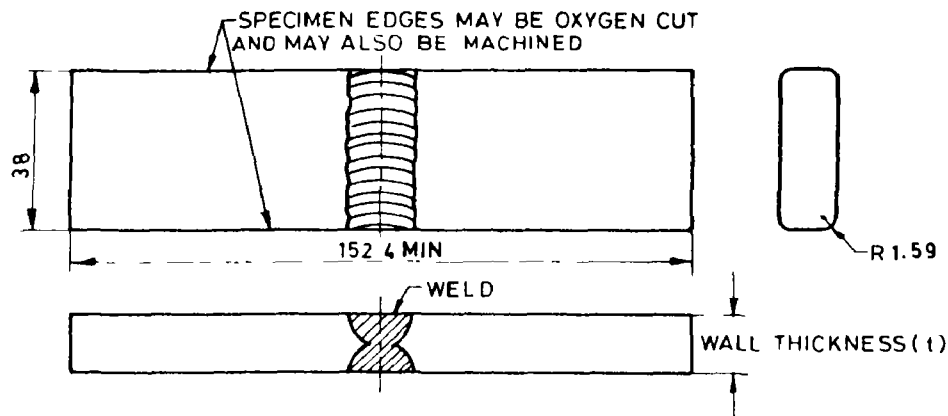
TRANSVERSE TENSILE TEST SPECIMEN
